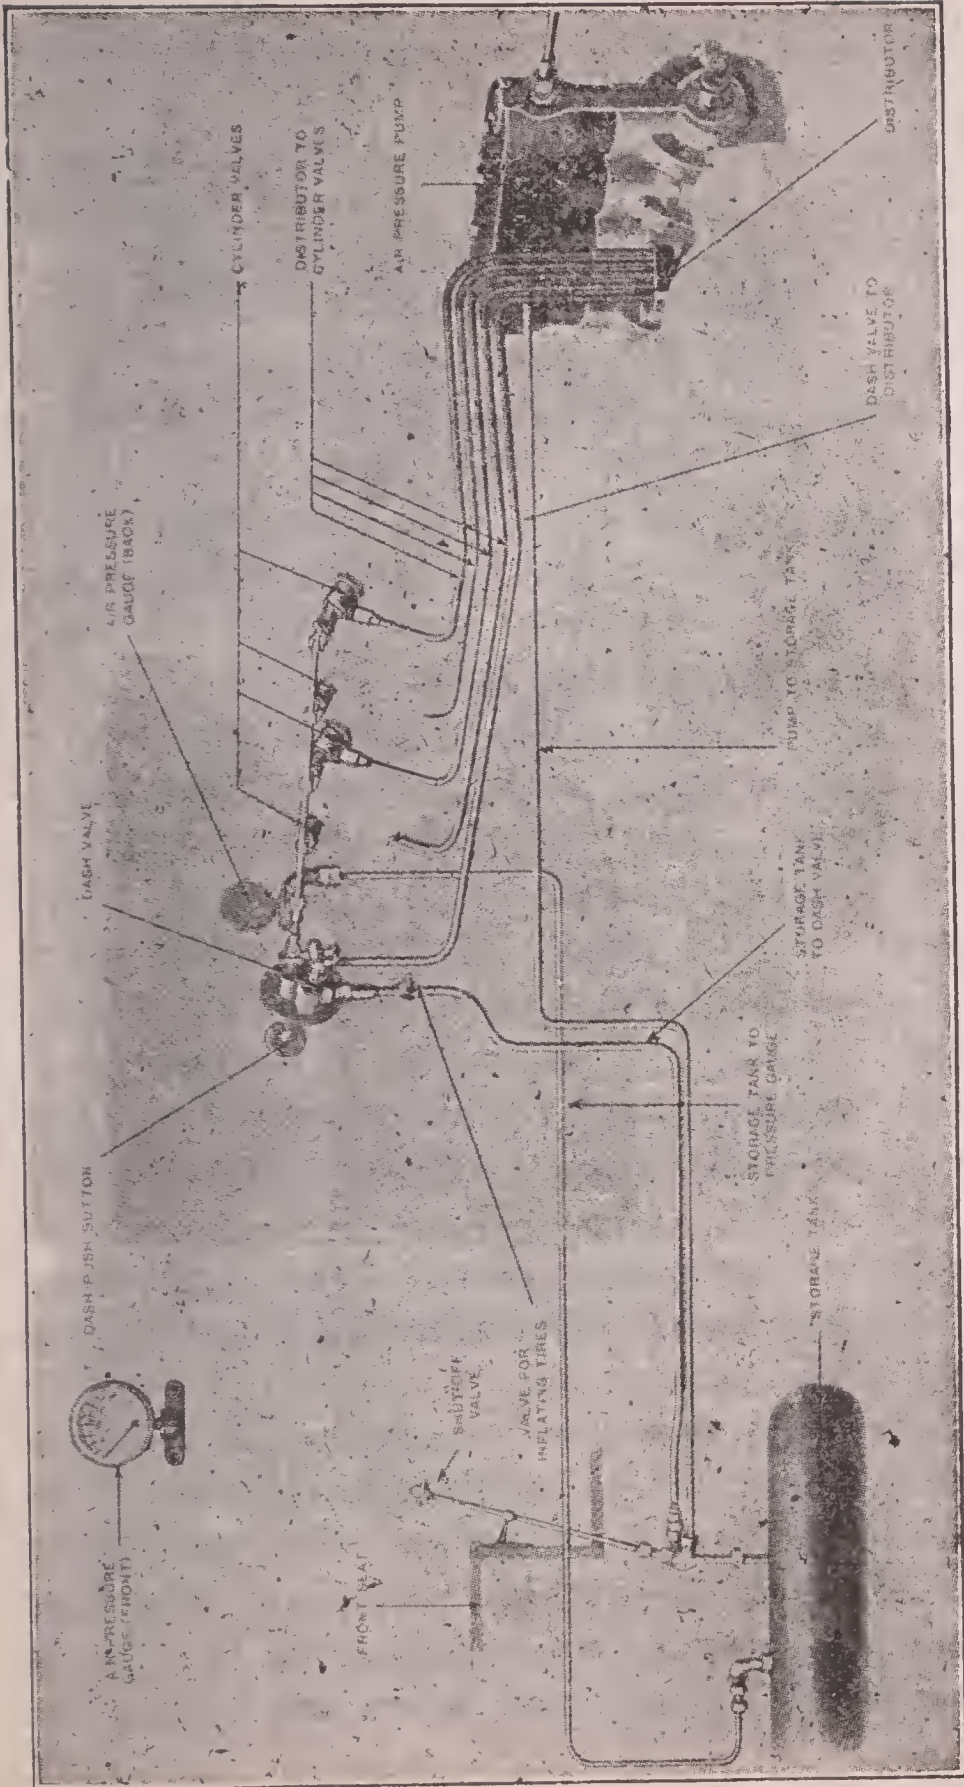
Chalmers Air Pressure Starting Mechanism.
